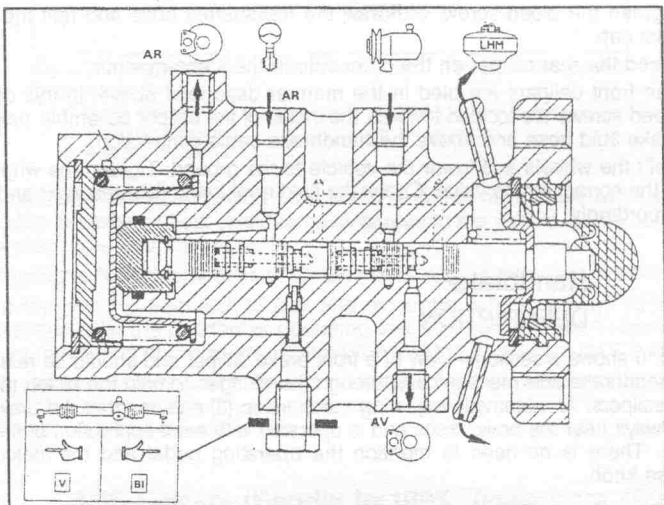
View of the brake compensating valve. "AV" indicates the front, "AR" the rear. The steering symbol refers to L.H.D. and R.H.D. vehicles.
